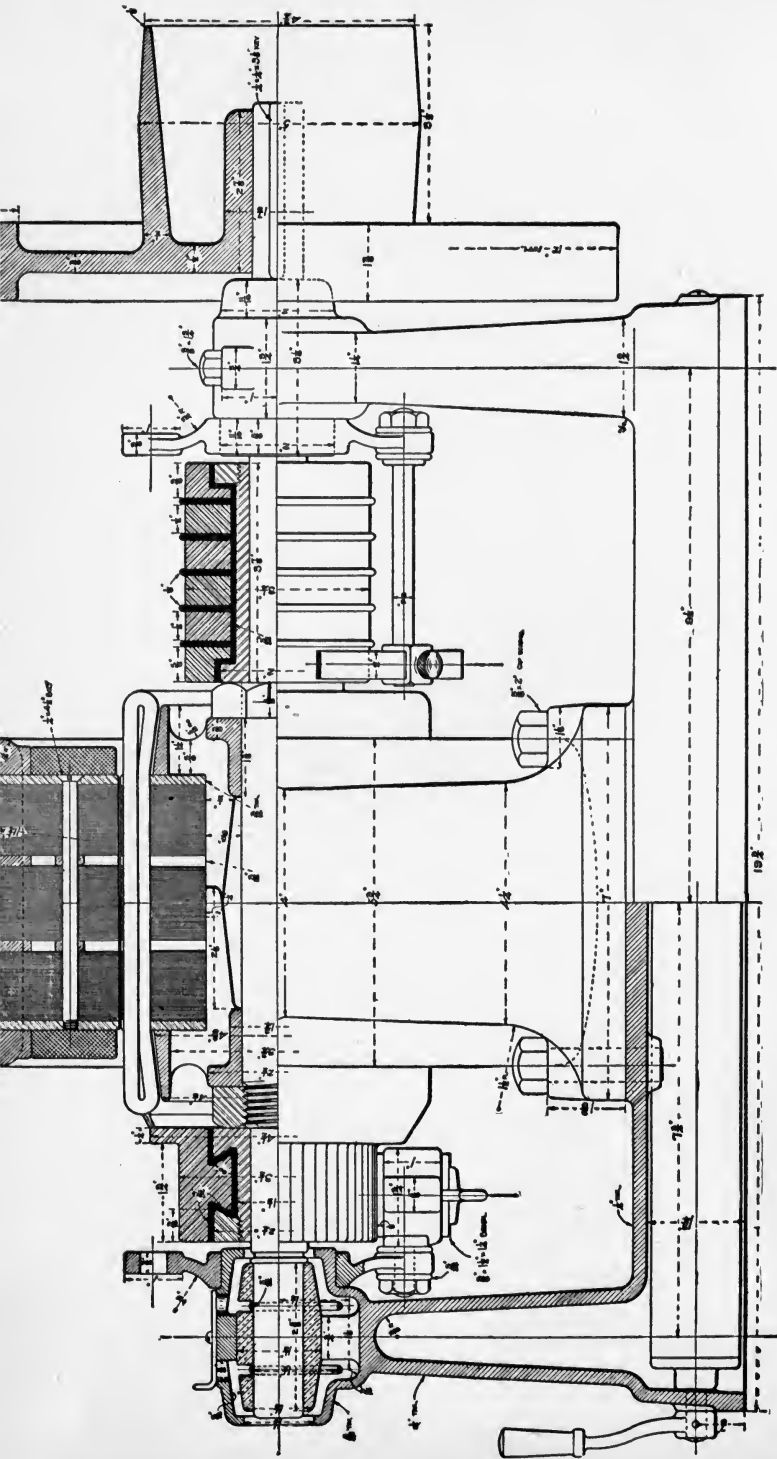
LONGITUDINAL ELEVATION OF THE COMPLETE MACHINE, ONE-HALF IN CROSS SECTION.
